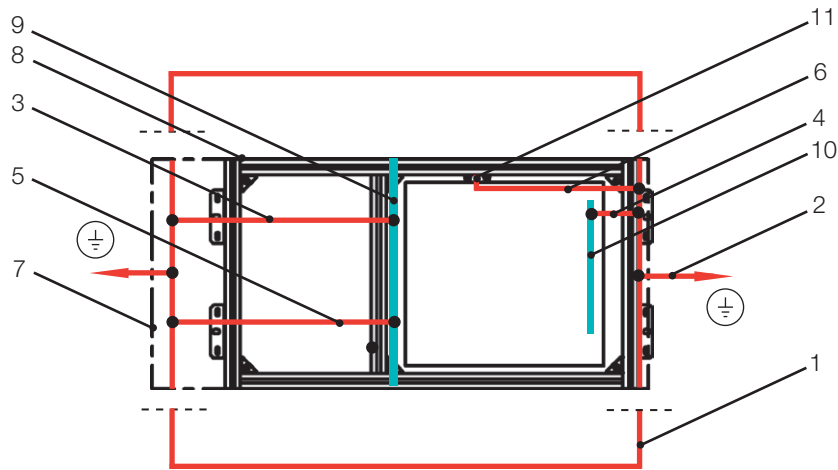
Earthing recommendation, plan view (section A-A of figure 10.7.3.1)
